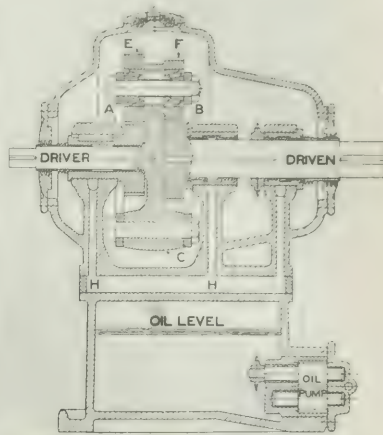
SECTION OF SPEED TRANSFORMER.
